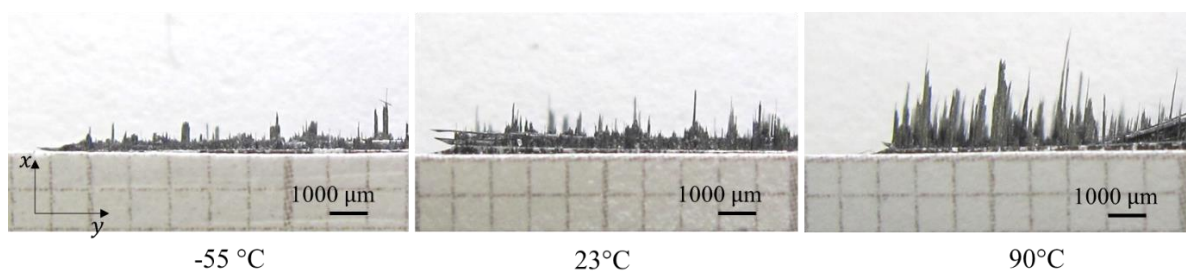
Photographs of fracture surfaces obtained through compact tension tests under different temperatures.
